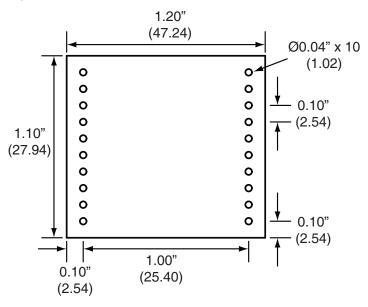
EVM-GPS-F4 PCB Layout Dimensions
